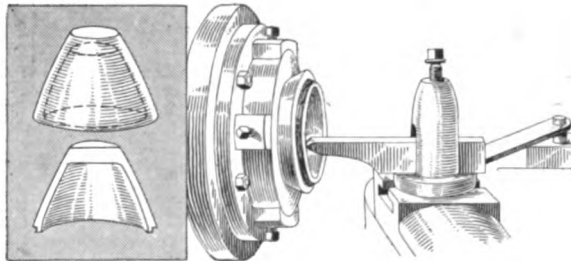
MACHINING THE ADAPTER—FORMING INSIDE, FACING AND THREADING
